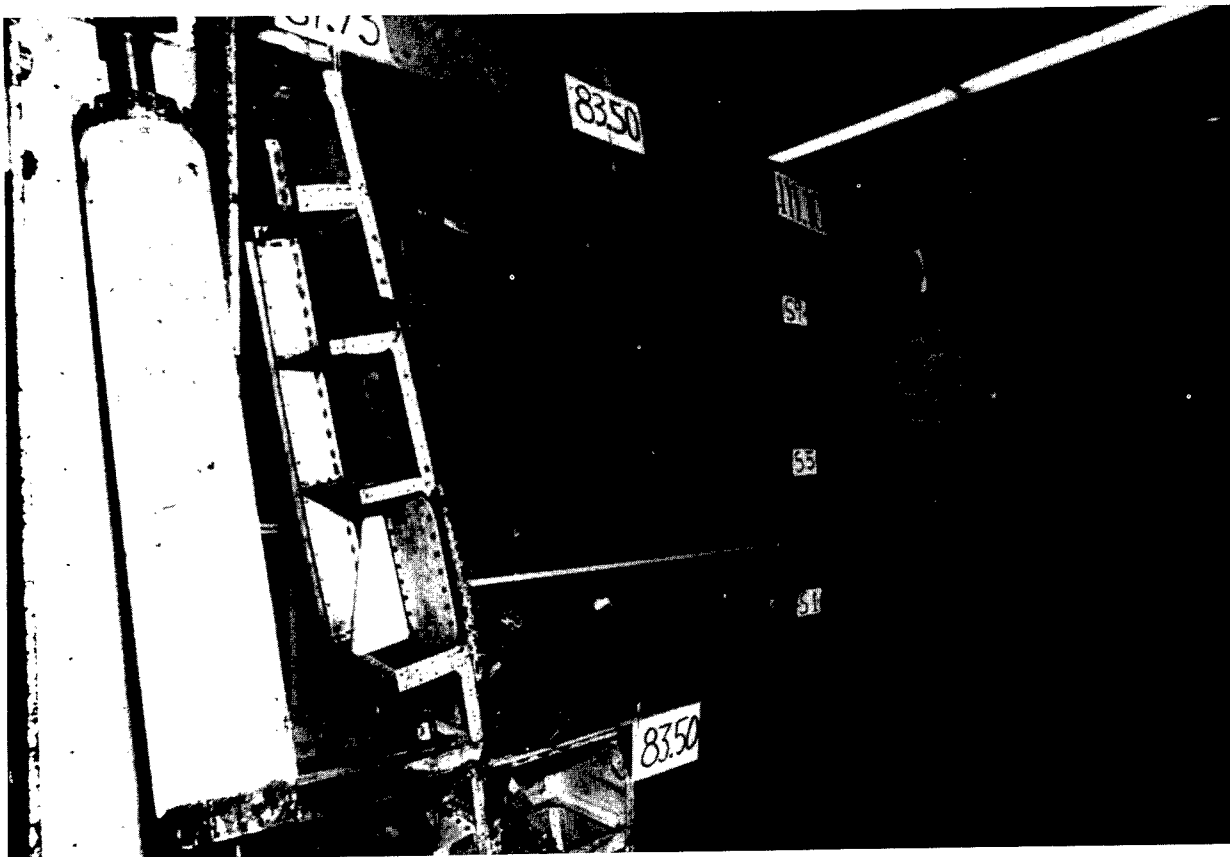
B. Stabilizer Mounted for Inspection, Lower Surface
